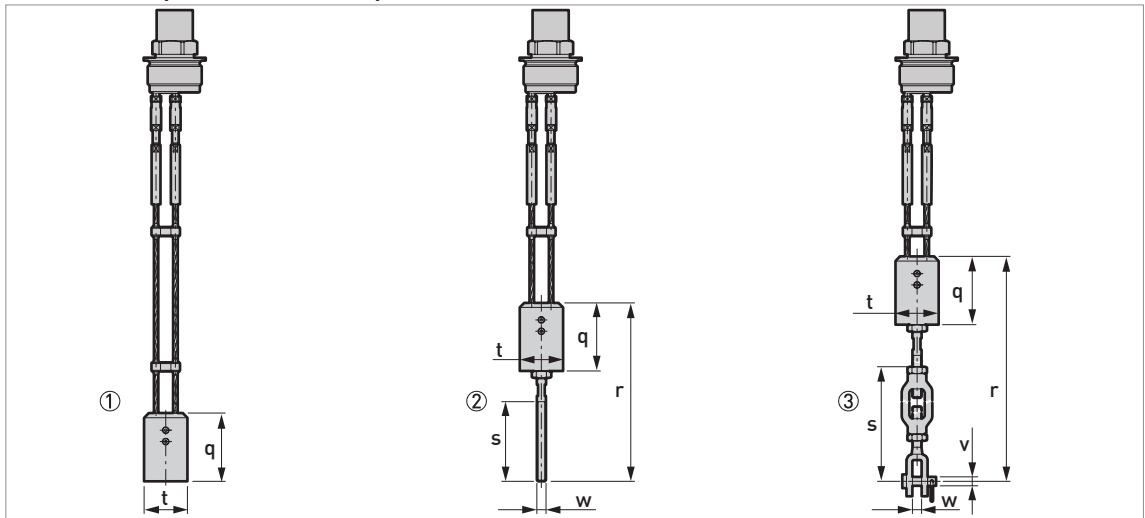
Probe end options for cable probes: double cable Ø4 mm / 0.16"
